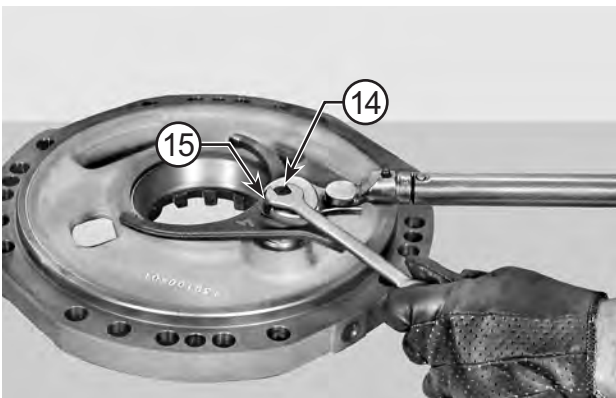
As you hold piston (14) in position, lock the nut (15) with a torque wrench.
